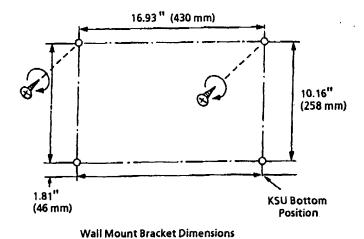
Attaching the Wall Mount Bracket for the KSU to the Wall
